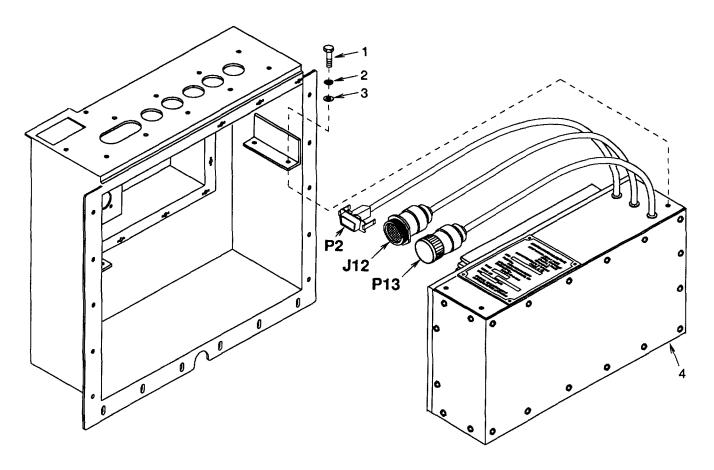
Motor Controller Assembly (MC1) NOTE
